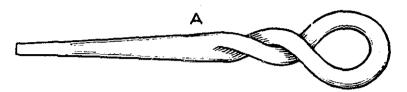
A SCREW DRIVER OF MILD STEEL AND TOOL STEEL
